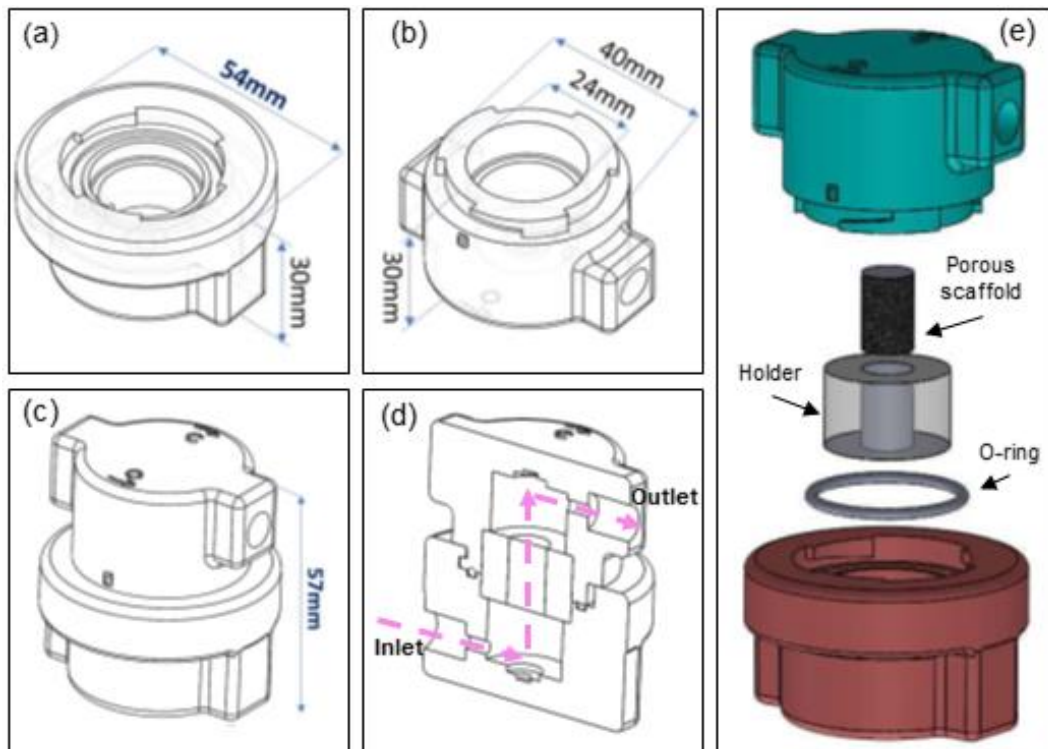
4. Design of the culture chamber, last version: CAD models of the upper (a) and lower (b) parts, 3D and exploded view of the coupled system (c and d, respectively) and cross-sectional view showing the internal geometry of the chamber. Images courtesy of the Solid and Fluid Biomechanics Group – Department of Mechanical and Aerospace Engineering.
